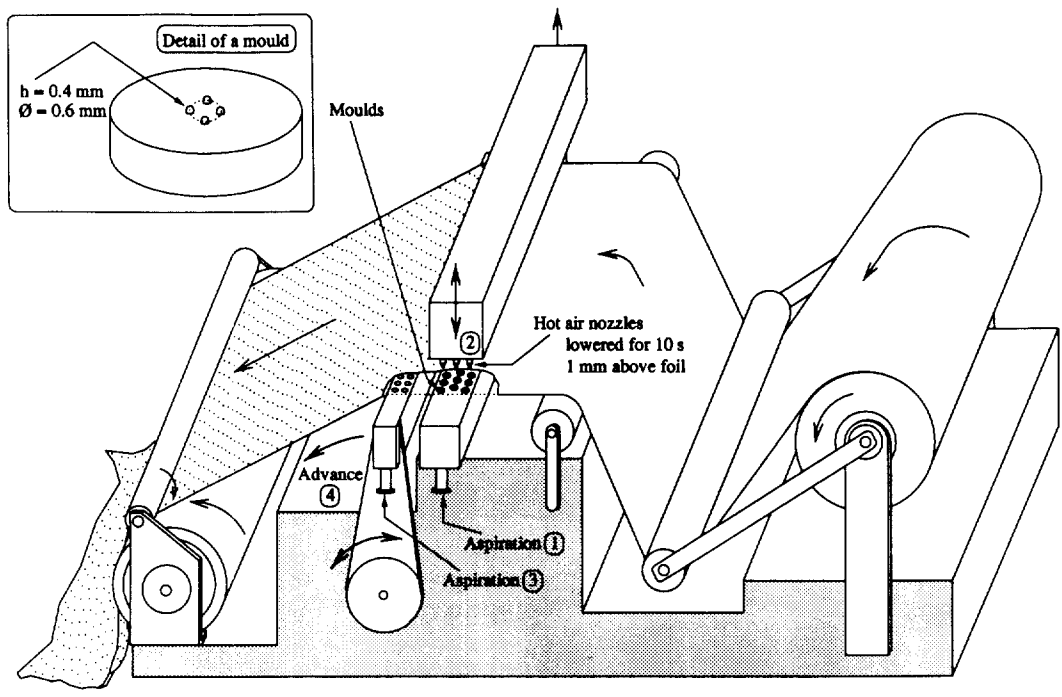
Principle of the radiator foil embossing machine (not to scale).
